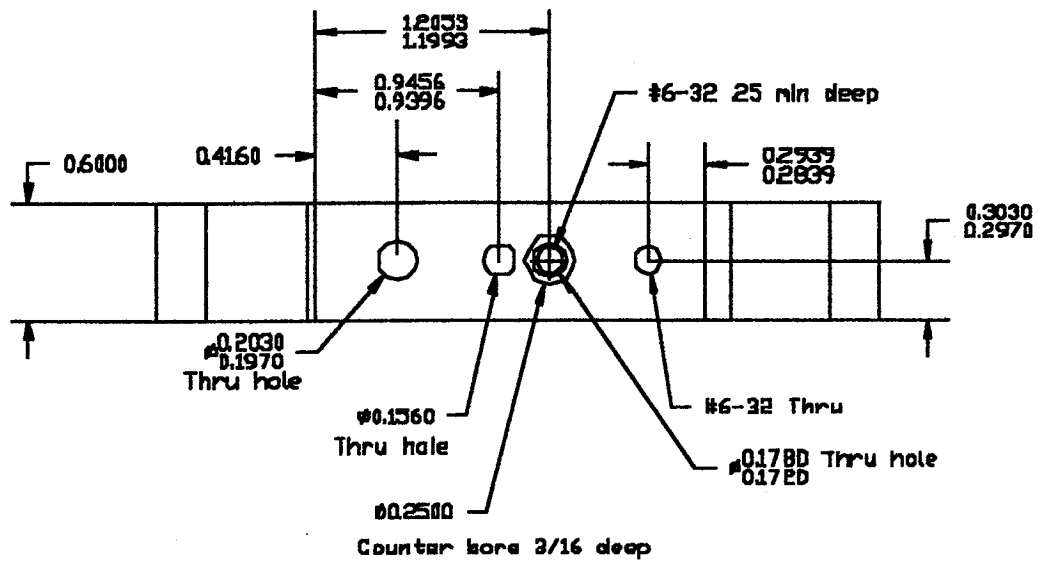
Dimensioned drawing of clamping mechanism, top view.
